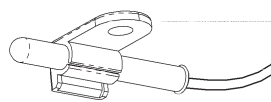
Remote Probe Mounting with a Flexible Probe Bracket (BA/FPB)
